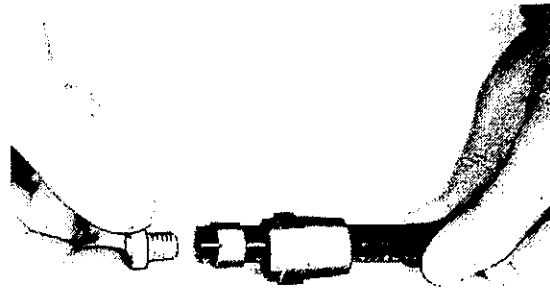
Assembling end fittings <sup>V1546</sup>
